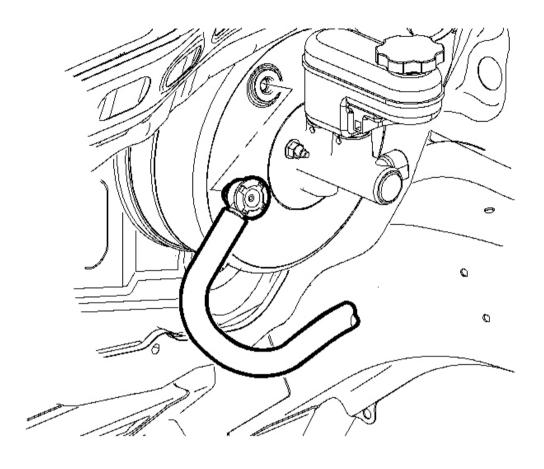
Removing/Installing Vacuum Booster Check Valve & Hose Assembly Courtesy of GENERAL MOTORS CORP.
